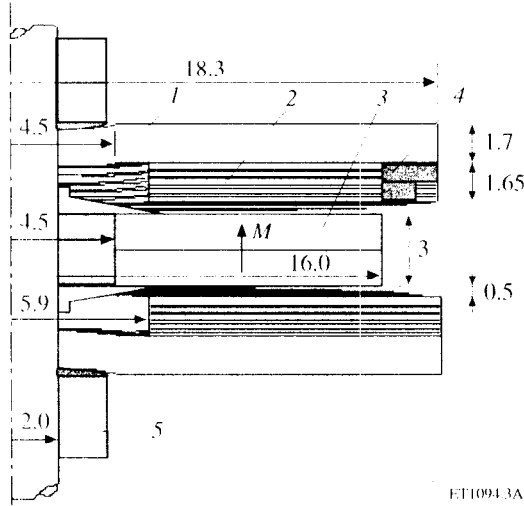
Main dimensions (in mm) of the prototype (1 magnetic back iron; 2 etched winding; 3 rotating magnetic disc; 4 position sensor; 5 bearing)
